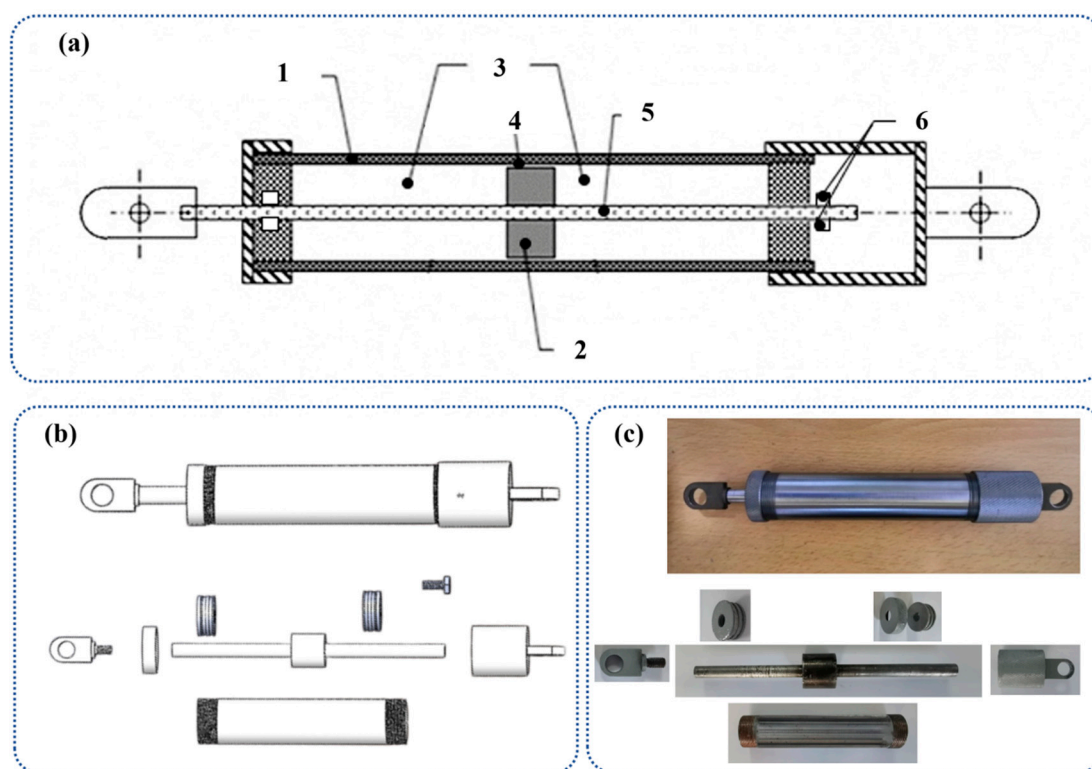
Designing of the STF damper (a) schematic, 1. Damper tube, 2. Piston head, 3. Cylinder chamber, 4. Annular gap, 5. Piston rod, 6. Seal rings (b) 3D model (c) Prototype.
